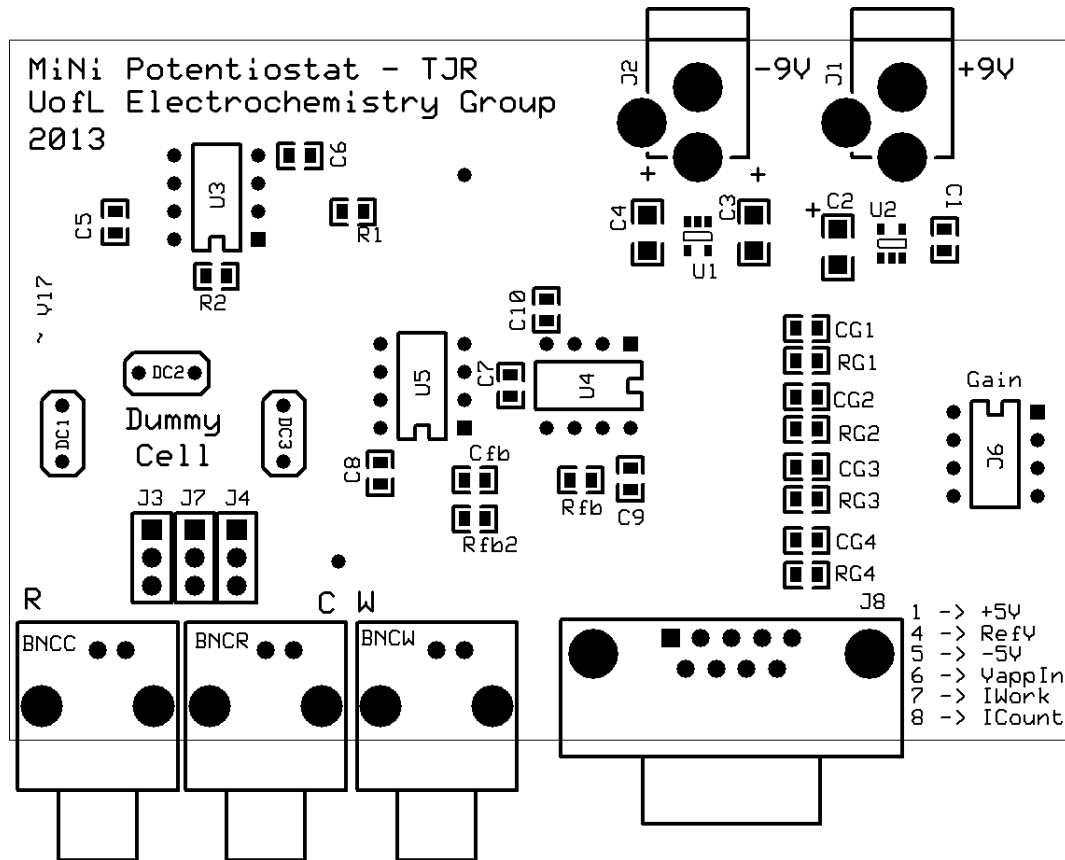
Silkscreen image of the final printed circuit board design layout.
